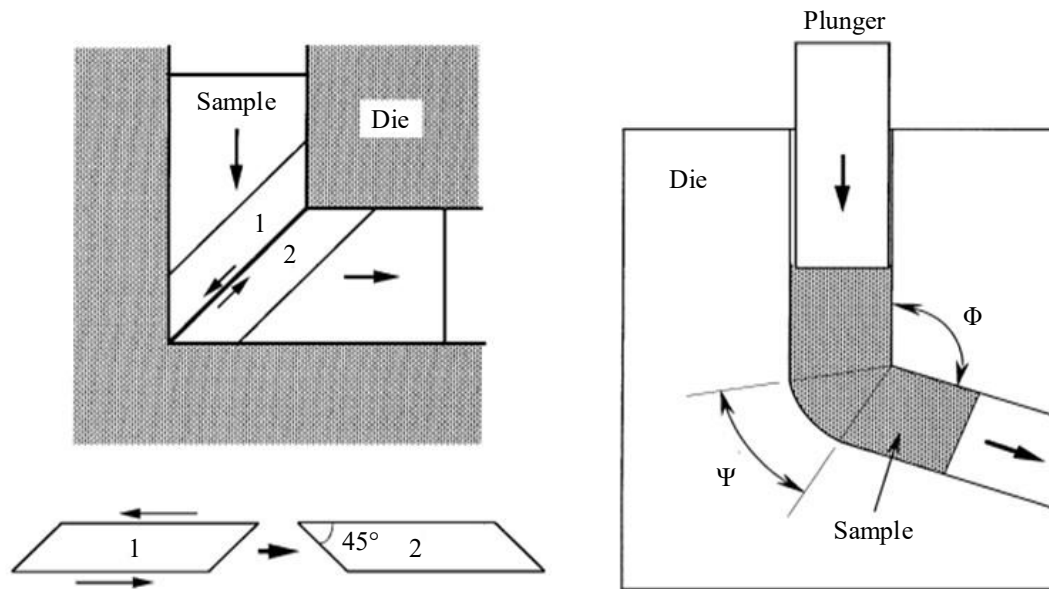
The concept of inducing shear between elements 1 and 2 in the ECAP process, along with a cross-sectional view of an ECAP die illustrating the two internal angles ϕ and ψ [28].
